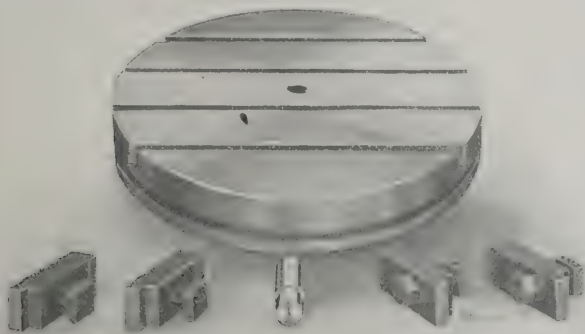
Rotary Table used on the Horizontal Boring Machine
